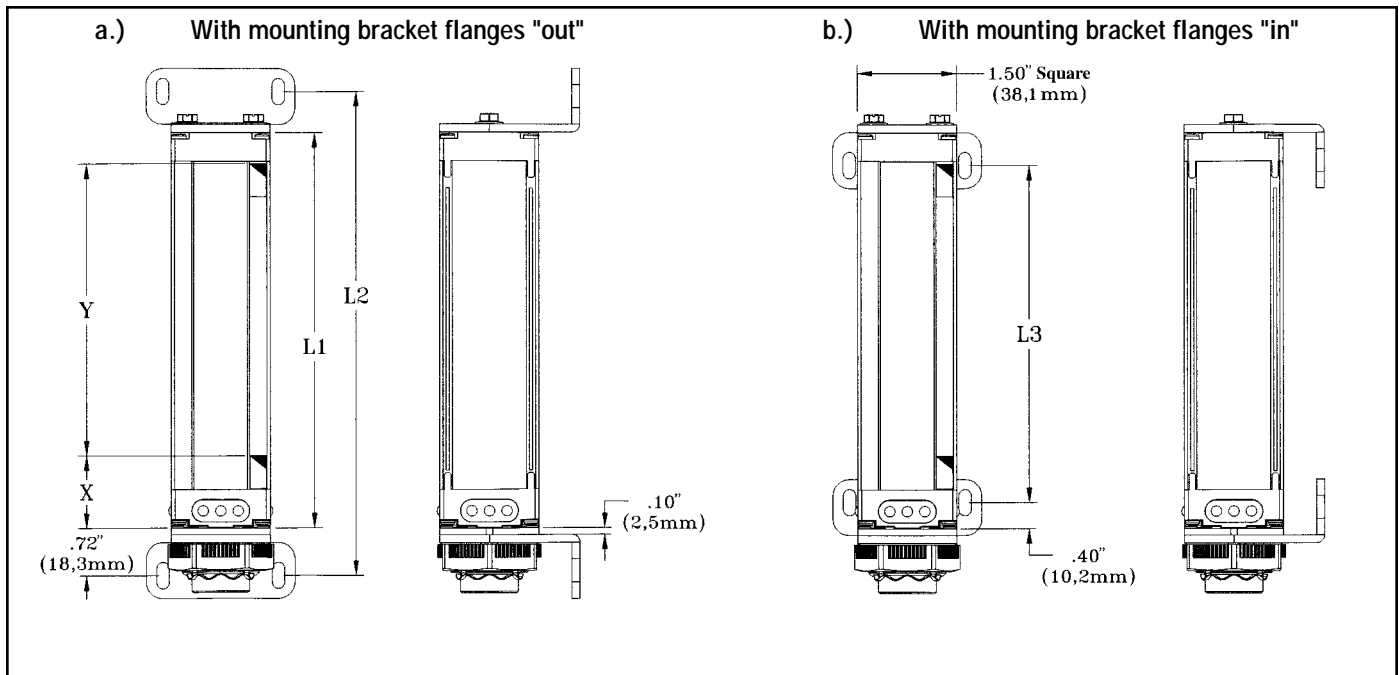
Emitter and Receiver Mounting Dimensions and Location of Defined Area.
